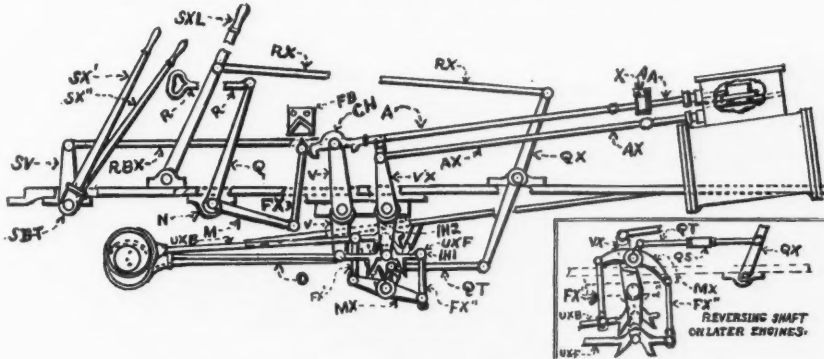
M. W. Baldwin's "V" Hook Gear; 1850-1853.
